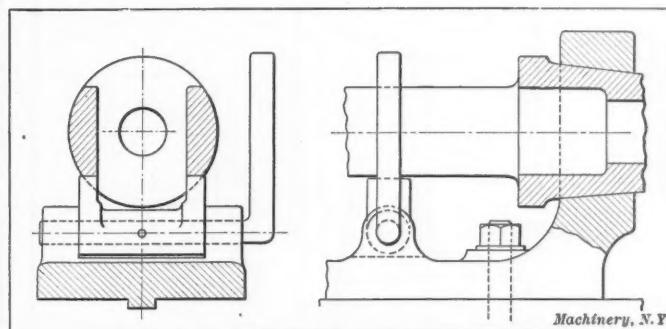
Lock for Open Spindle of John Lang & Sons Turret Lathe
